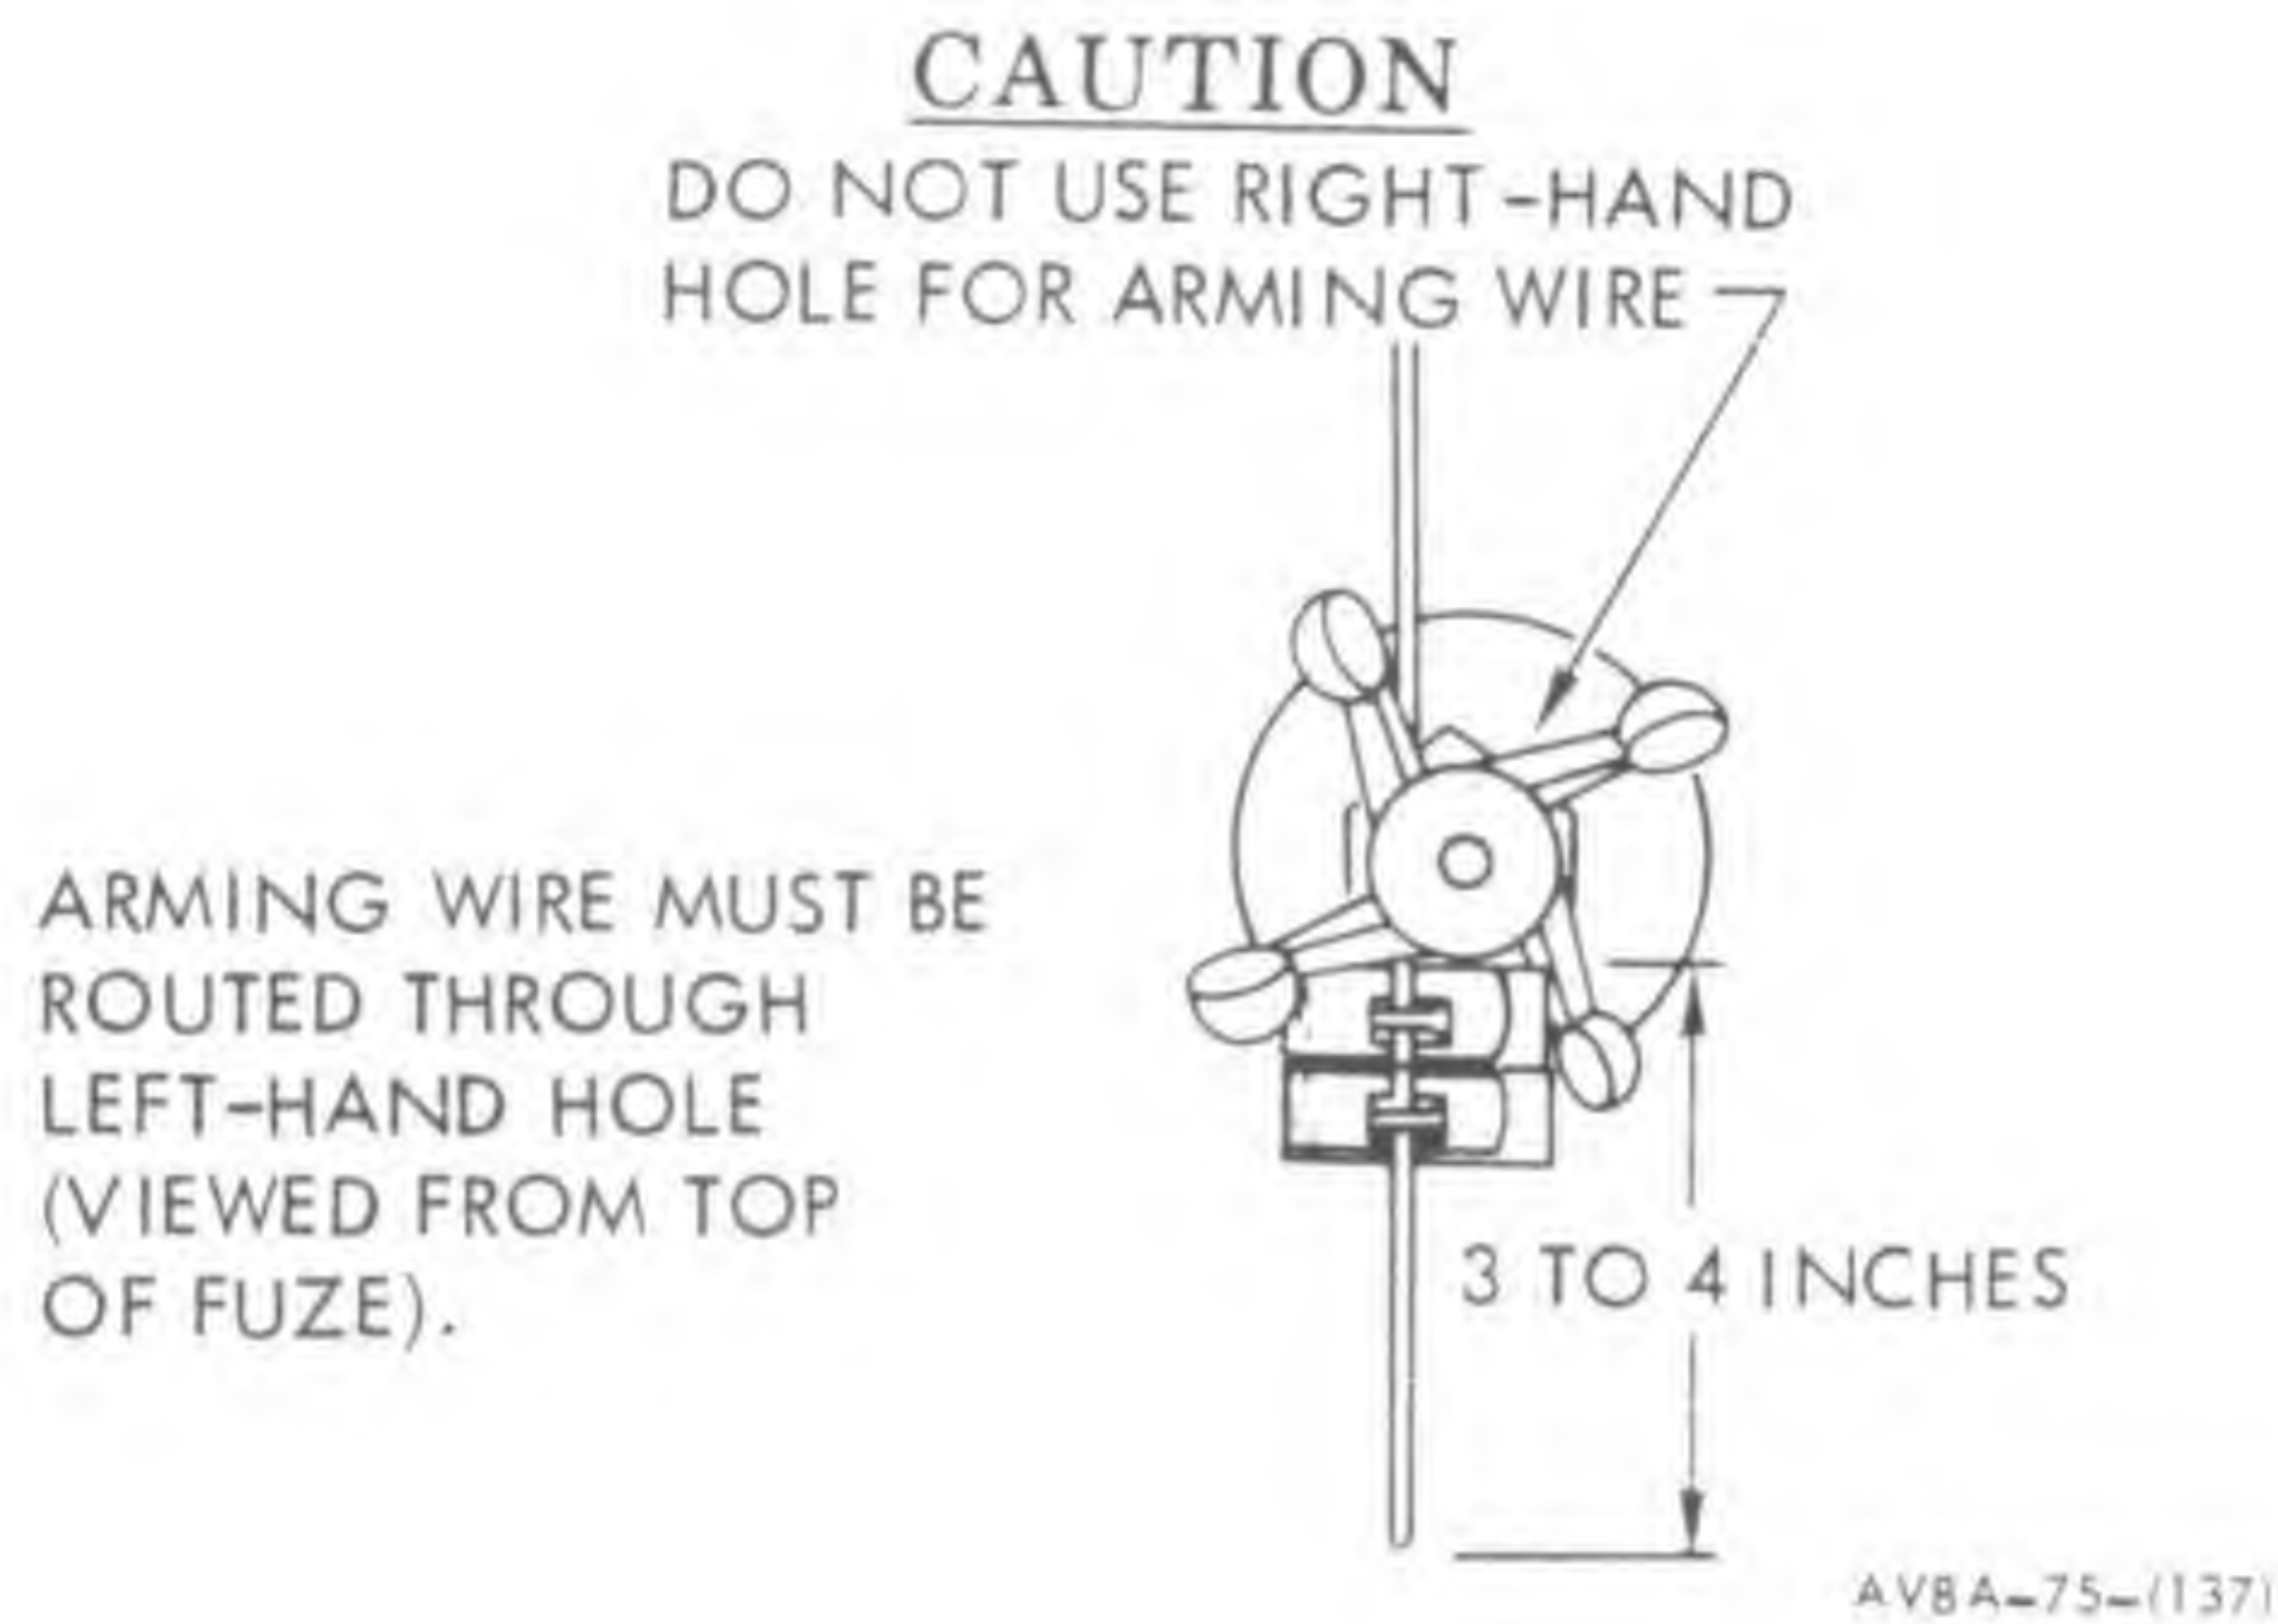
Arming Wire Thru Left Arming Wire Hole
